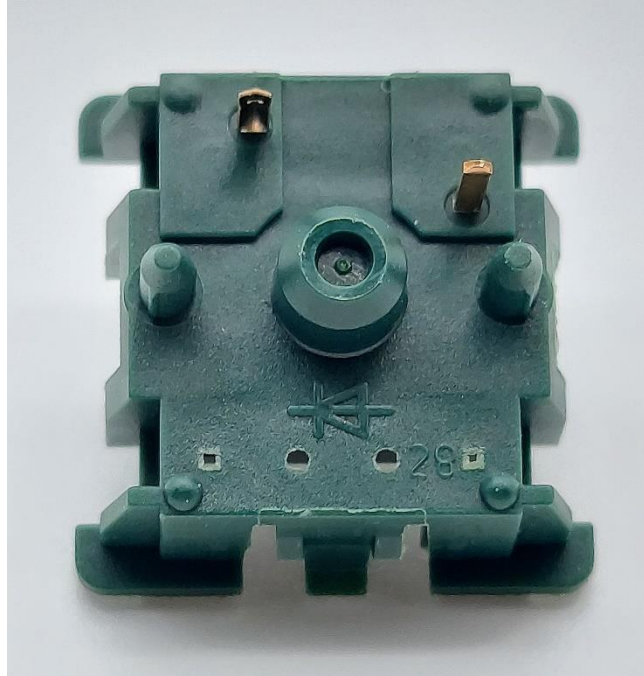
SP Star Sacramento bottom housing externals showing double digit mold marking in bottom right-hand corner.
